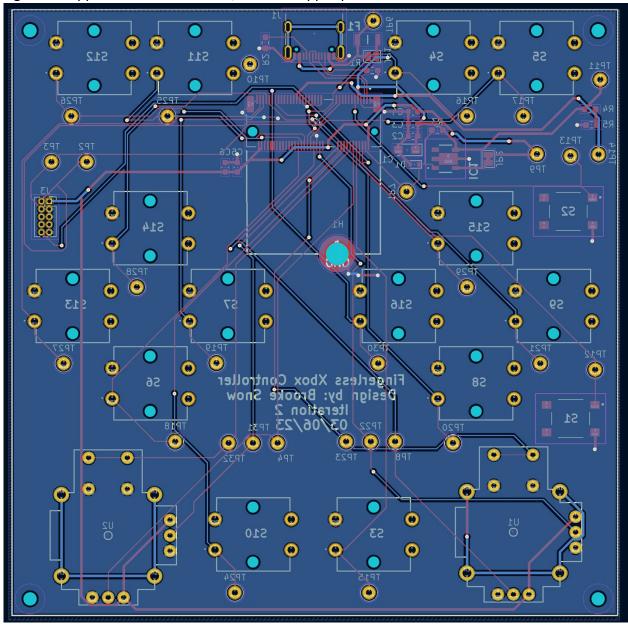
Flipped view of Entire PCB, Bottom copper prominent
